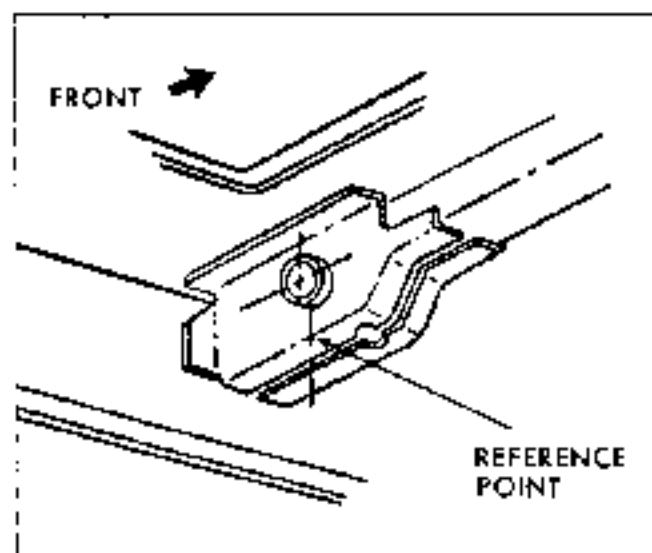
Side Rail at Spring Rear Shackle Hole
